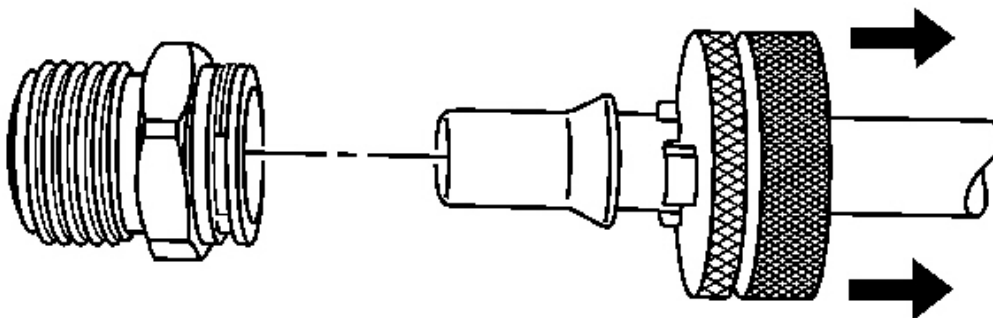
Disengaging Pipe From EOC Pipe Fitting
